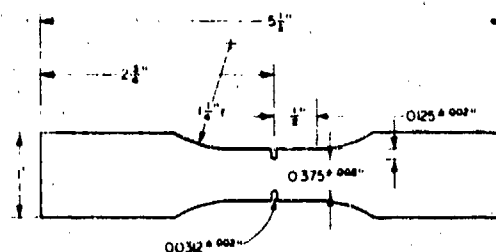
NOTCHED SHEET FATIGUE SPECIMEN
